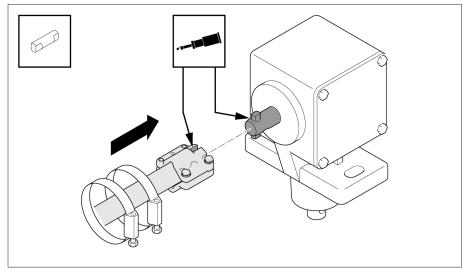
Sliding the square tube with the coupling part onto the shaft end
